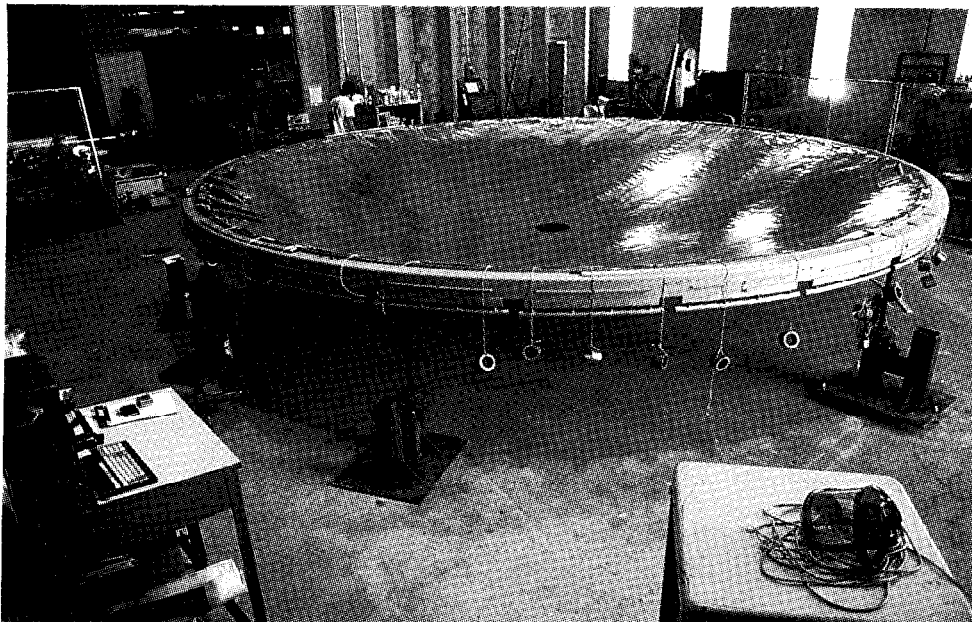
7-M Formed Membrane Unrolled onto Final Optical Element Ring Prior to Field Assembly.
